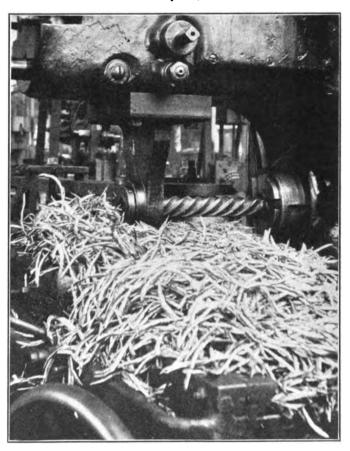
This Cutter Which Cut Very Freely, Would Not Stand the Feed
